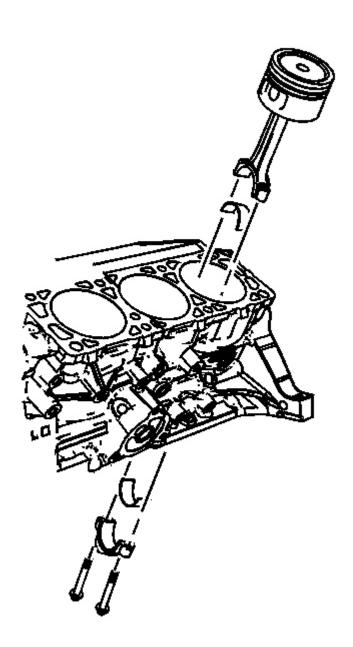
View Of Connecting Rod & Piston Assembly Courtesy of GENERAL MOTORS CORP.
